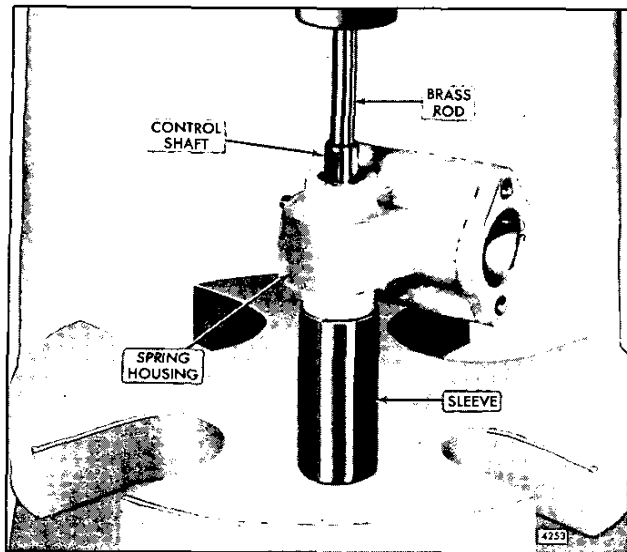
Removing Speed Control Shaft, Bearing and Cup Plug from Governor Spring Housing
